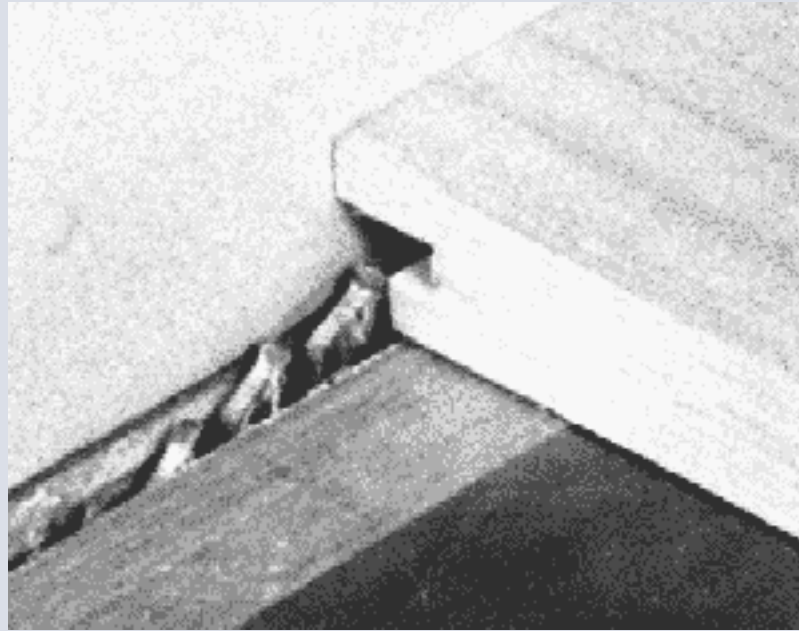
The second step in cutting the joints on the drawer fronts is to shorten one of the tongues.
